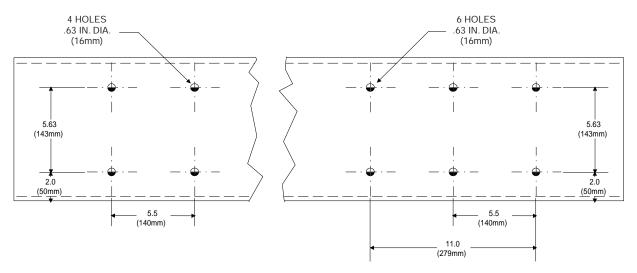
Crossmember-Gusset Hole Pattern Requirements. [inch (mm)]
